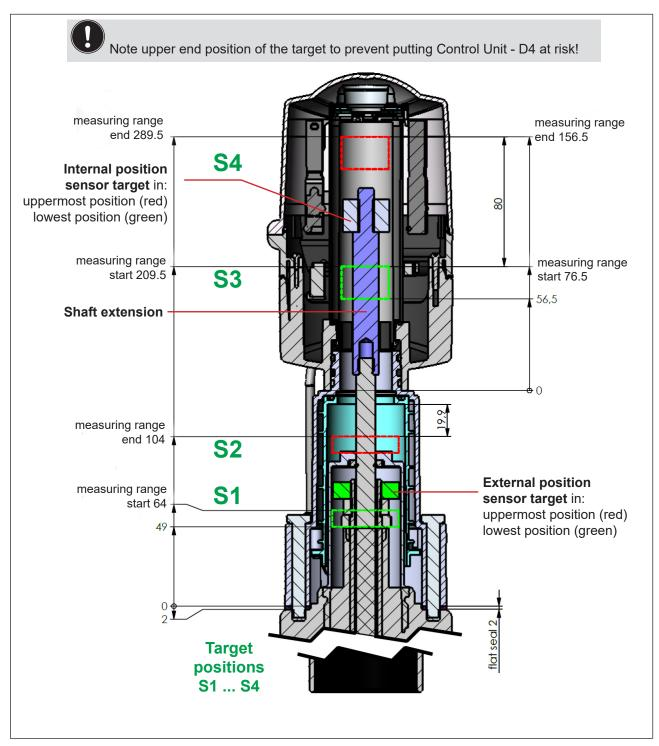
Sectional view of device and shaft with both targets of internal and external position sensor
